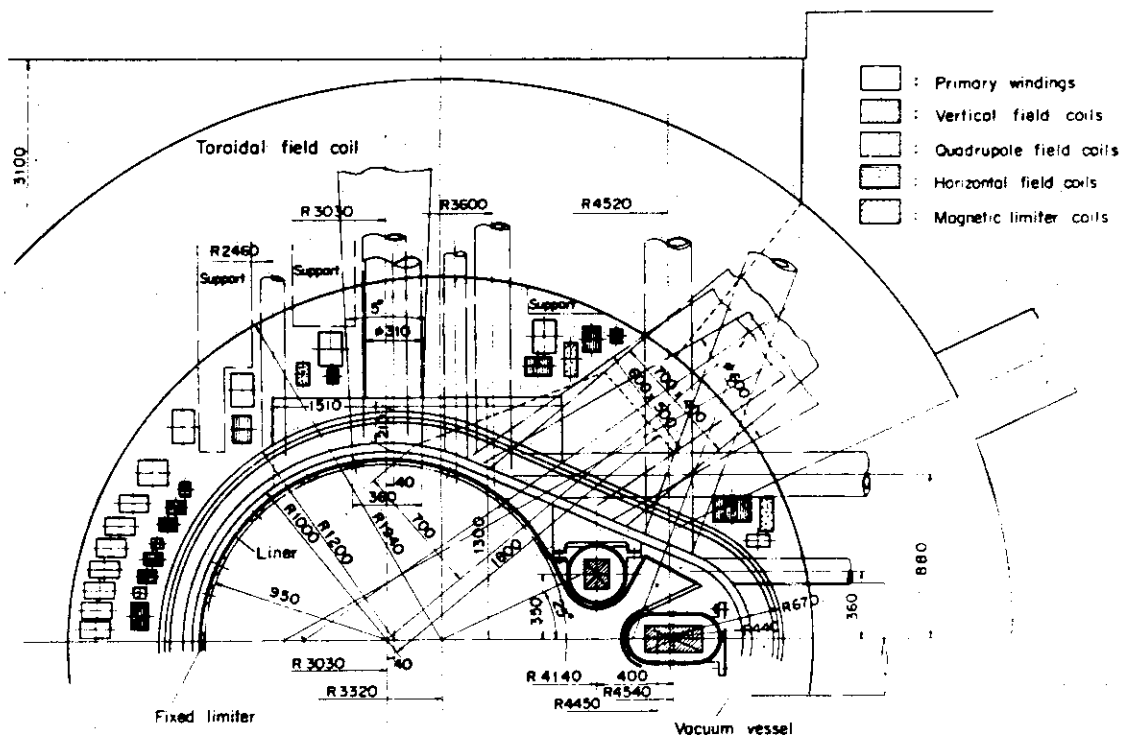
Cross sectional view of a vacuum vessel
